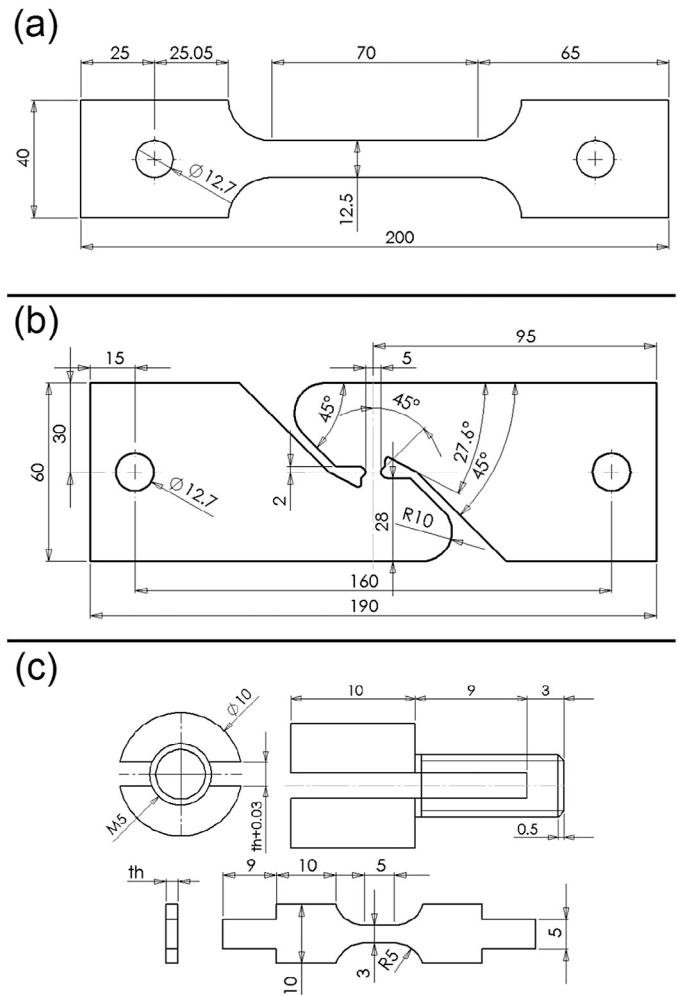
Geometries of material test specimens: (a) uniaxial tension, (b) in-plane shear and (c) uniaxial tension in split-Hopkinson tension bar.
